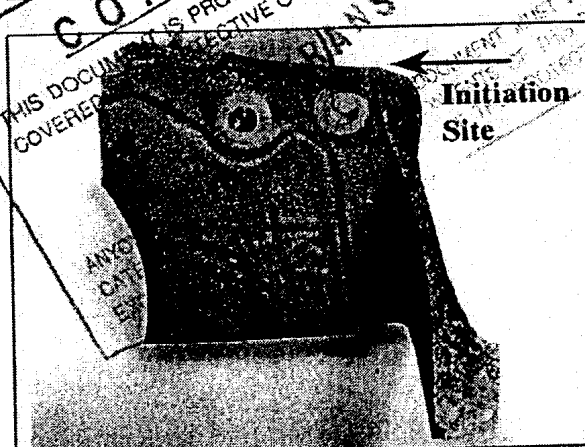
Fracture surface of fatigue crack number 1.
